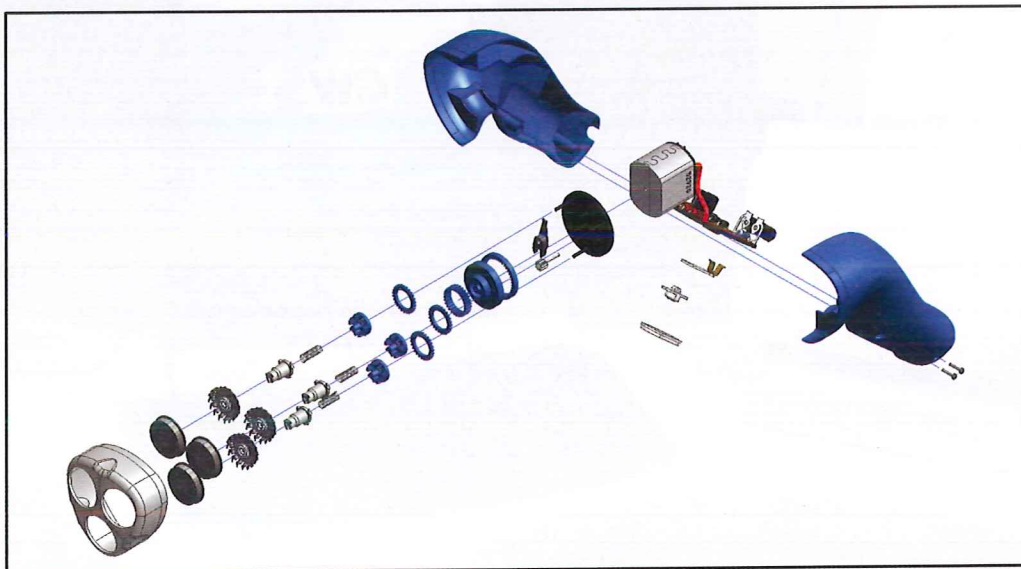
Animation can be used by the CAD designer to simulate the assembly of parts for this model of a shaving device (currently shown in an exploded view for presentation). (Autodesk, Inc.)
